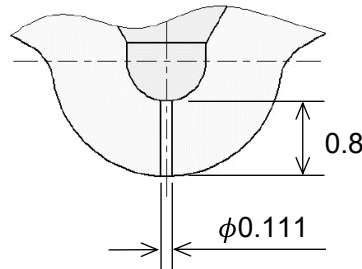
Geometry of the test injector nozzle (single hole)
